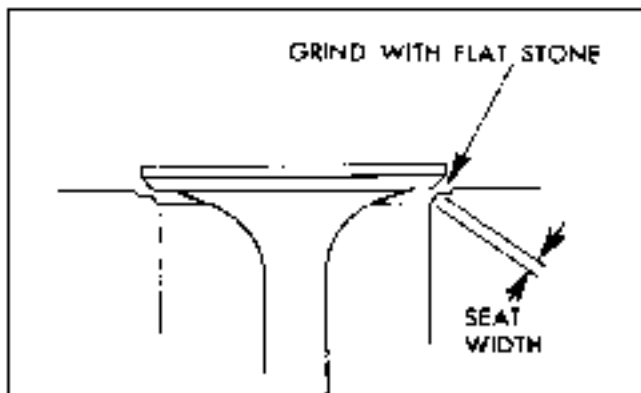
Valve Seat After Grinding With Flat Stone
